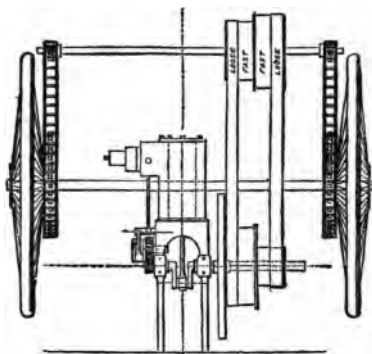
Arnold's (Benz) Oil Engine Road Carriage (Part Plan).
